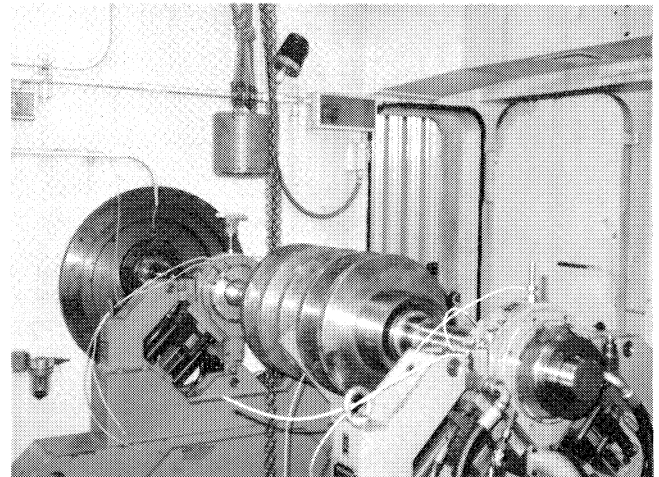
Rotor Mounted in Vacuum Balance Bunker.
